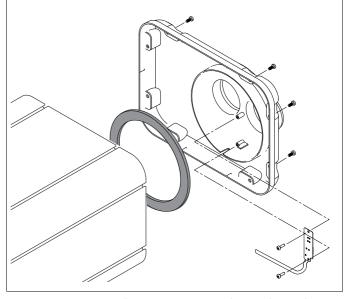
Remove housing cover, gasket and metal retaining plate.
